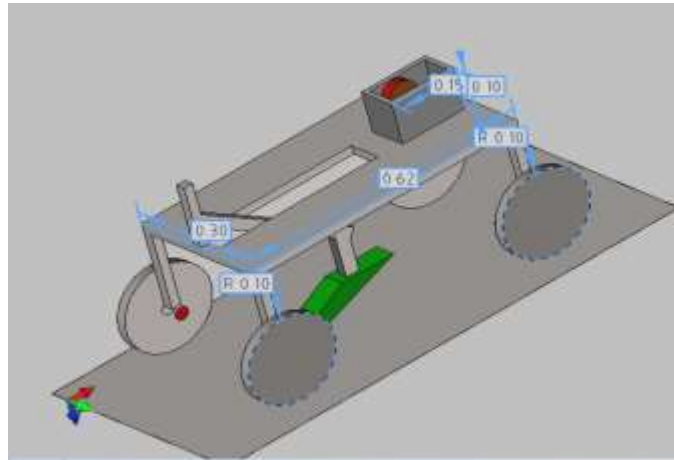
D VIEW OF SOLAR OPERATED SEED SOWING MACHINE
